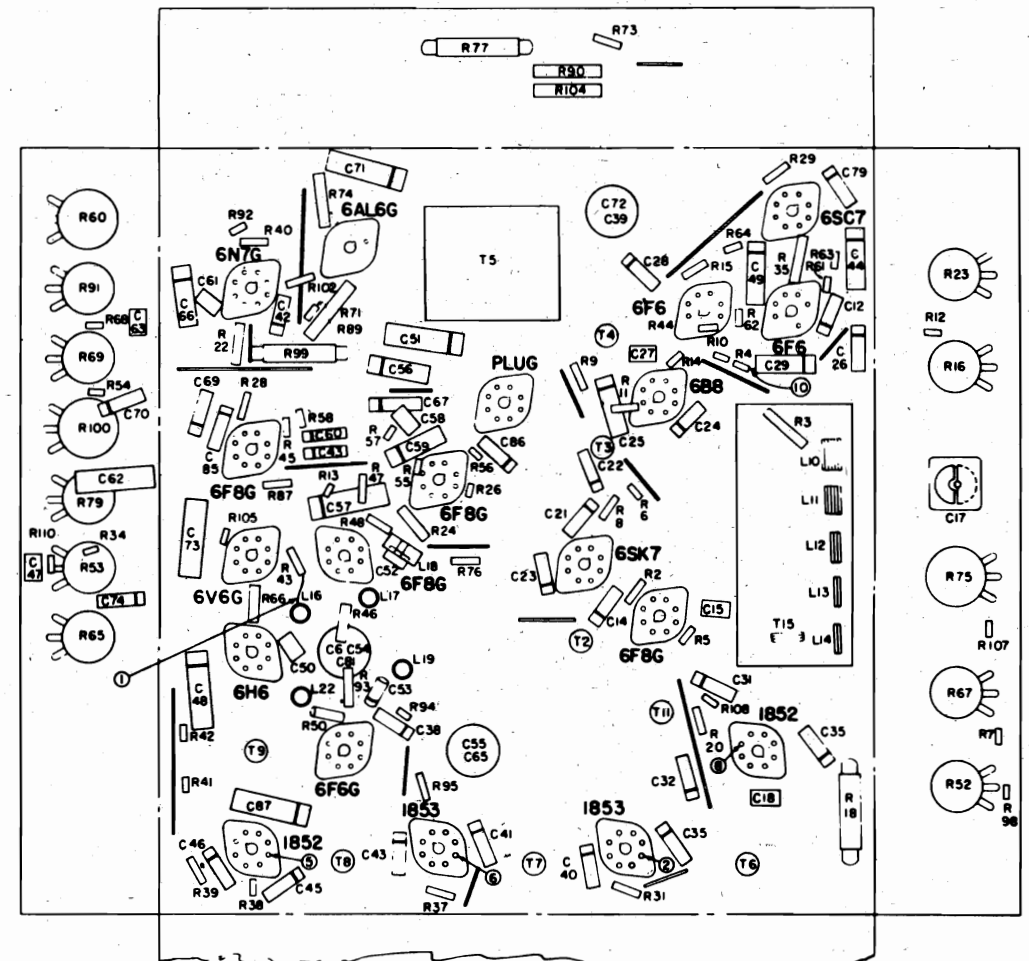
Television Chassis Parts Layout Models HM-225 and HM-226-7A
